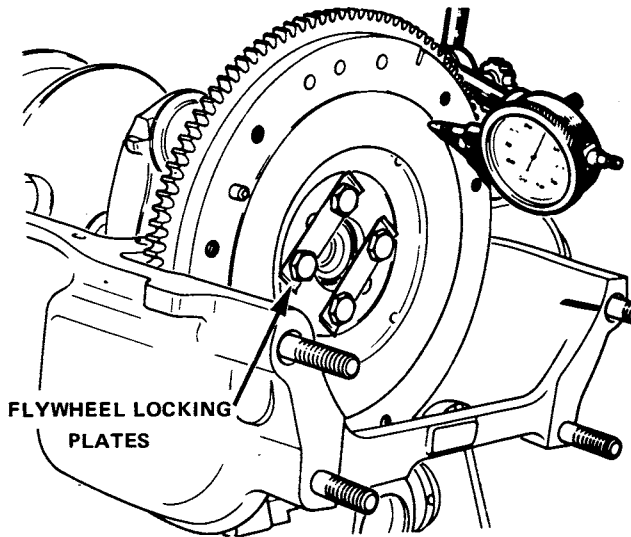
CHECKING FLYWHEEL RUNOUT
